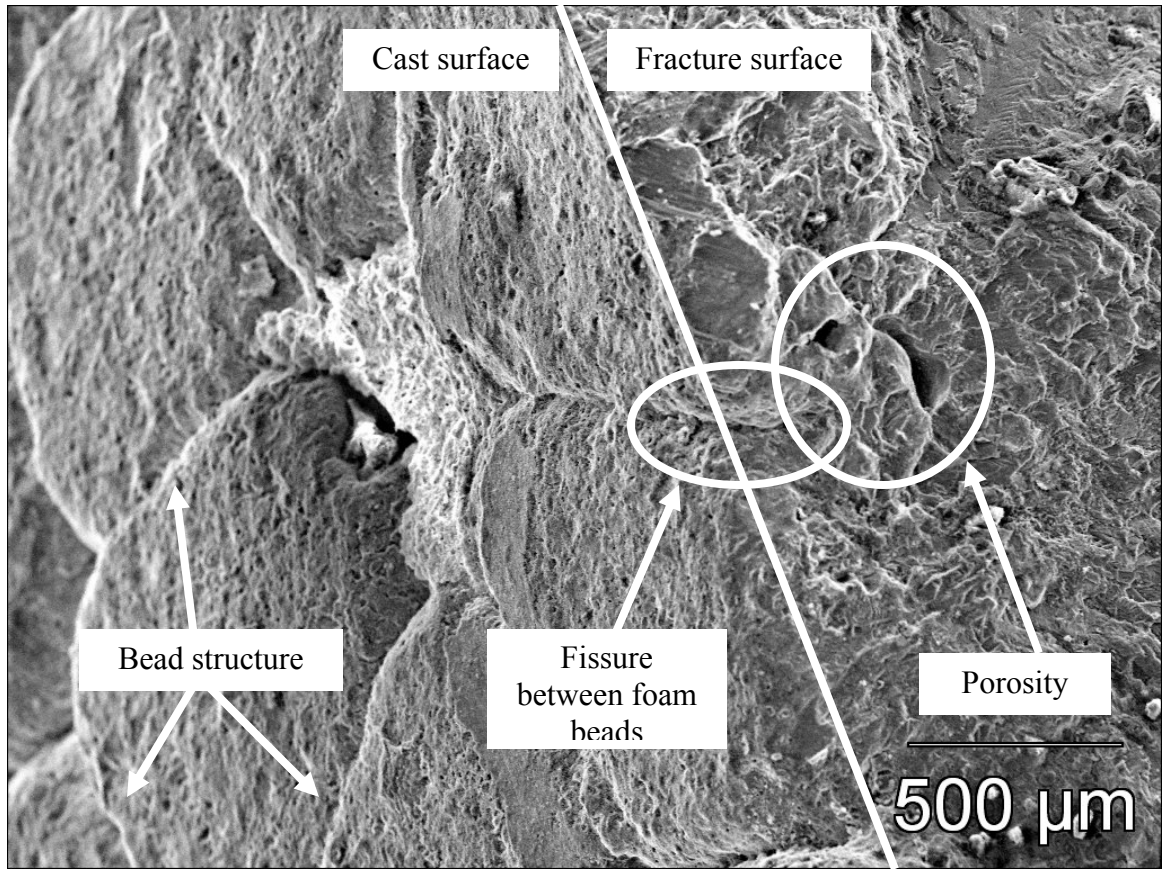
Scanning electron micrograph of fatigue crack in lost-foam outboard engine cylinder block casting. Left: cast surface; right: fracture surface. Some residual ceramic (refractory) is visible at the center left. Well-defined fatigue striations can be seen in the upper right. The fatigue crack appears to have initiated from a fissure between foam beads, along with a pocket of subsurface porosity. Ductile tearing appears to have taken place in the immediate vicinity of these two defects, followed by fatigue crack propagation.
